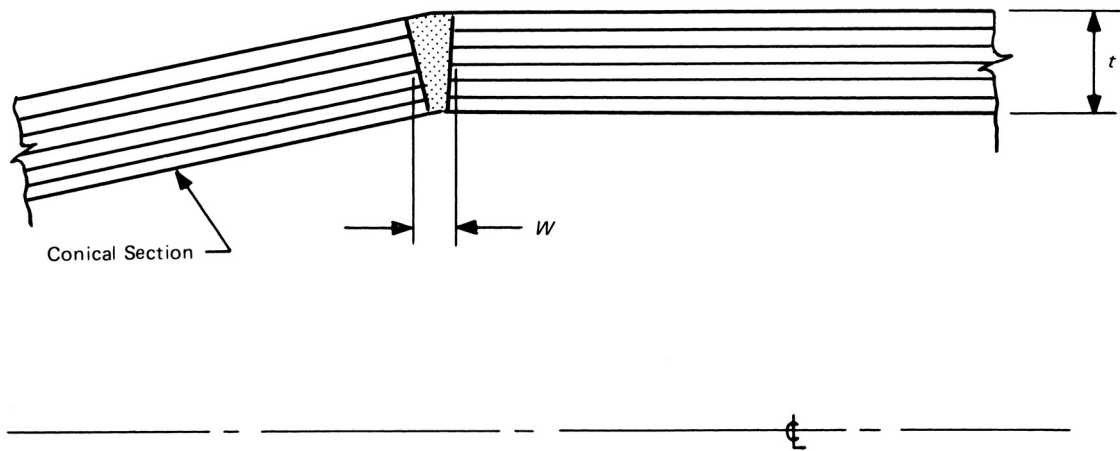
AN EXAMPLE OF CIRCUMFERENTIAL BUTT WELD ATTACHMENT BETWEEN LAYERED SECTIONS IN ZONE OF DISCONTINUITY
